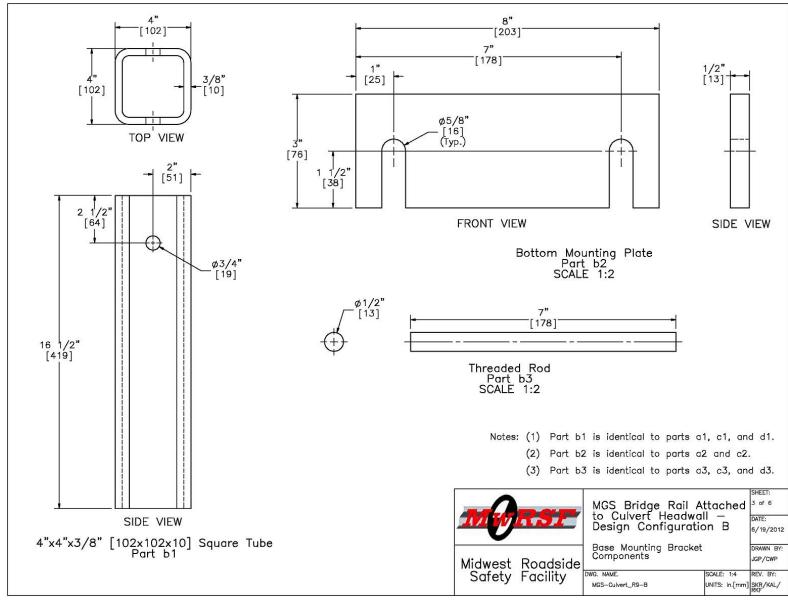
Design Concept B, Tube and Bottom Mounting Plate Details
